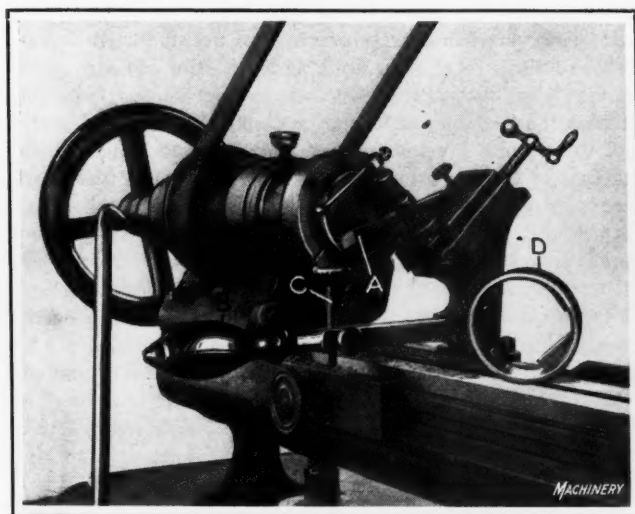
Set-up employed for threading the Bezel Case of a Dial Gage on a Bench Lathe
